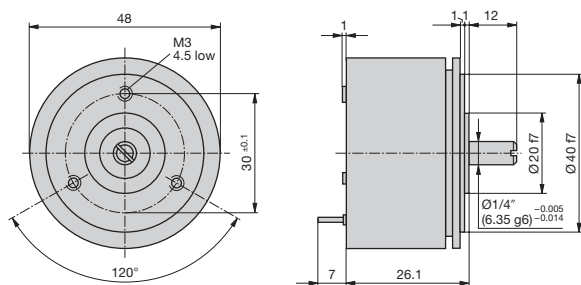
KINAX 3W2 with special drive shaft at front only, \varnothing 1/4", length 12 mm.
